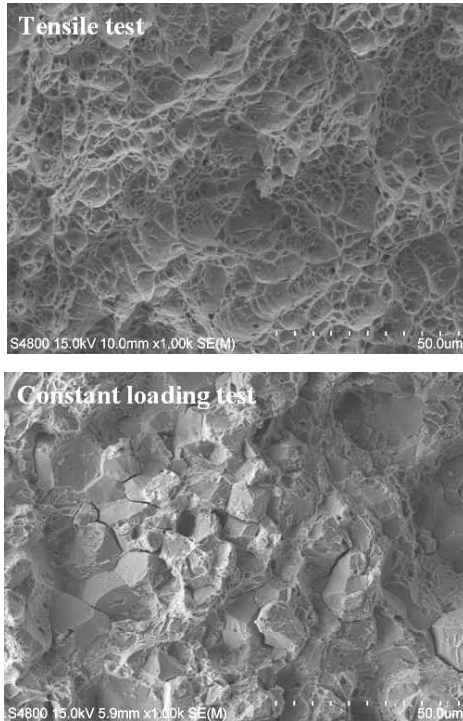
Fractographs of tensile test surface and CLT surface for 1GPa deposited weld metal
